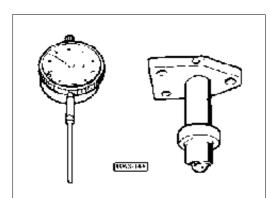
No. 5.9030.617.4 /10 injection pump timing equipment.
